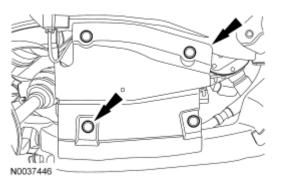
Locating Splash Shield Pin-Type Retainers Courtesy of FORD MOTOR CO.
